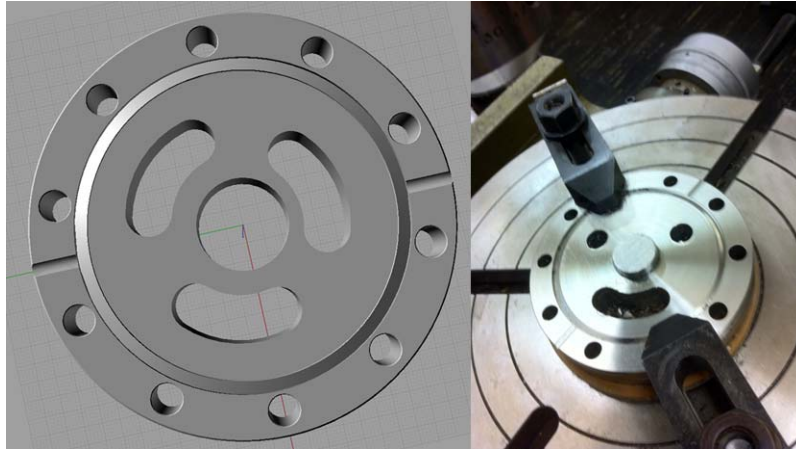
Left: Design of double sided flange in Rhino. Right: Double sided flange being machined for use in the vacuum system.
